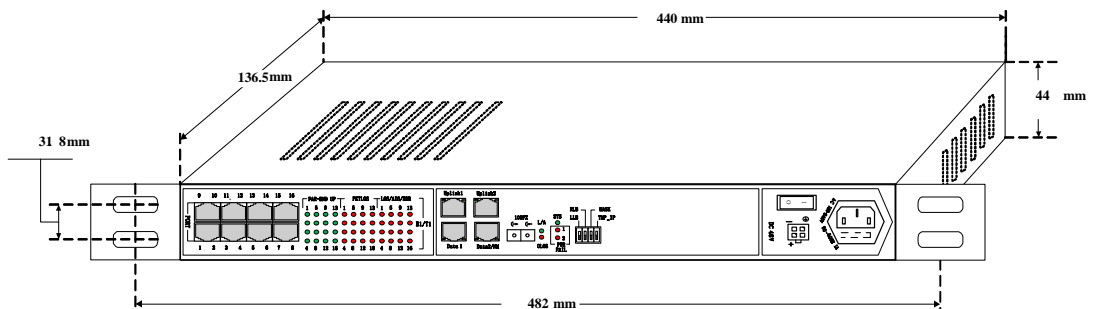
TECHROUTES-TDMOIP Mechanical dimensions
